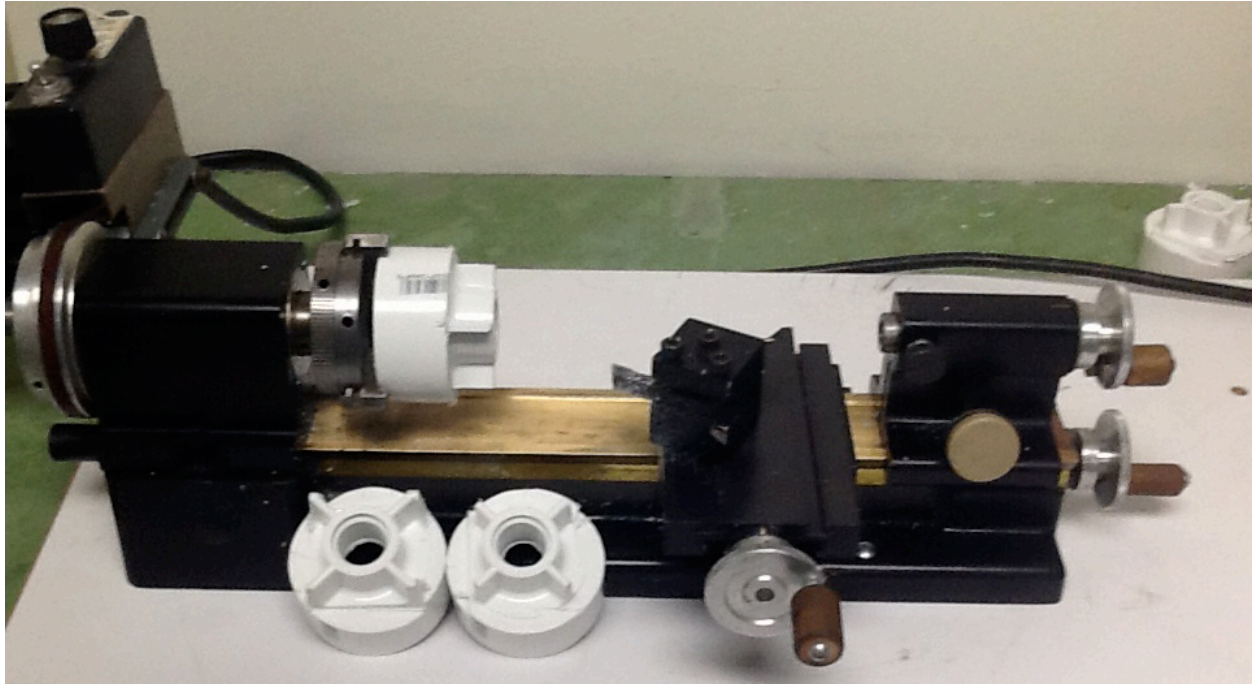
Fabrication of filter supports step 3. A lathe was used to turn the outside of the bushing frame to fit inside a 2" PVC knockout plug. Examples of finished (right) and unfinished (left) pieces are shown against the lathe.
